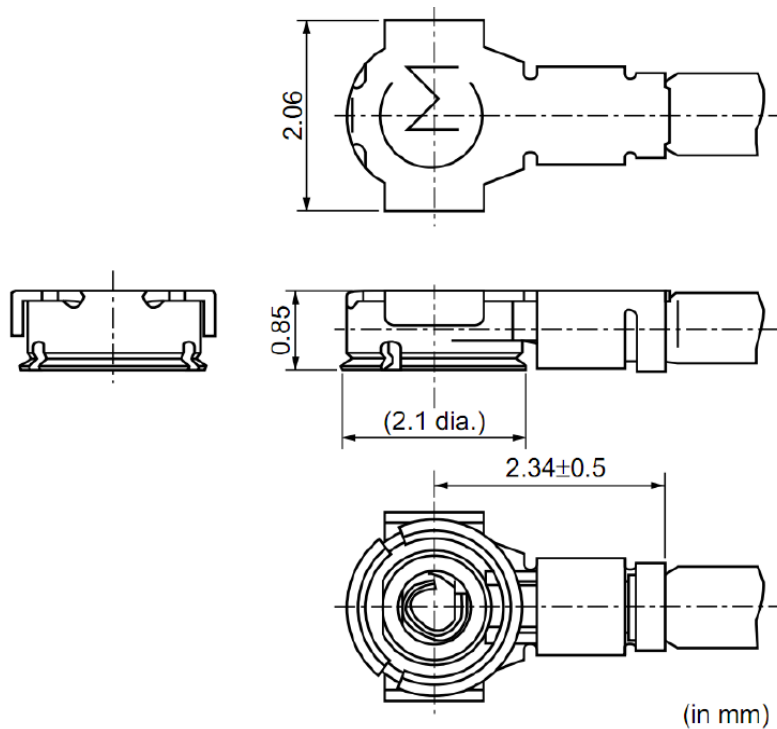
Dimensions of Mated Plugs (\varnothing 0.81/ \varnothing 1.13 mm Coaxial Cables) (Unit: mm)
